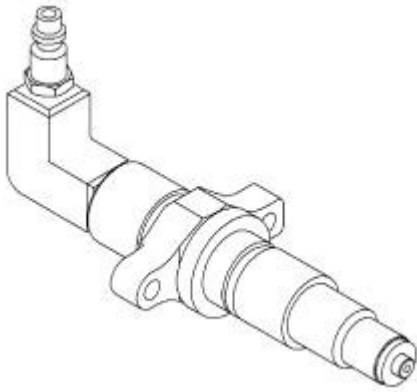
ADAPTER, COMPRESSION TEST - 9007
